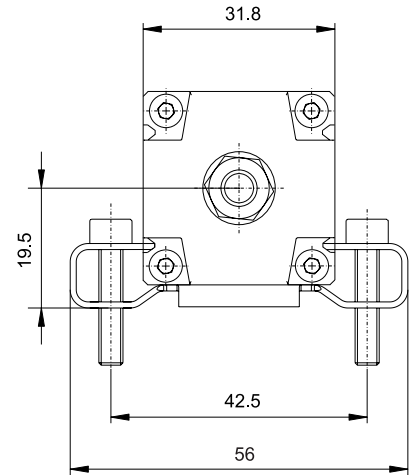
Dimensional drawing (BIW1...P1-S115 transducer)
